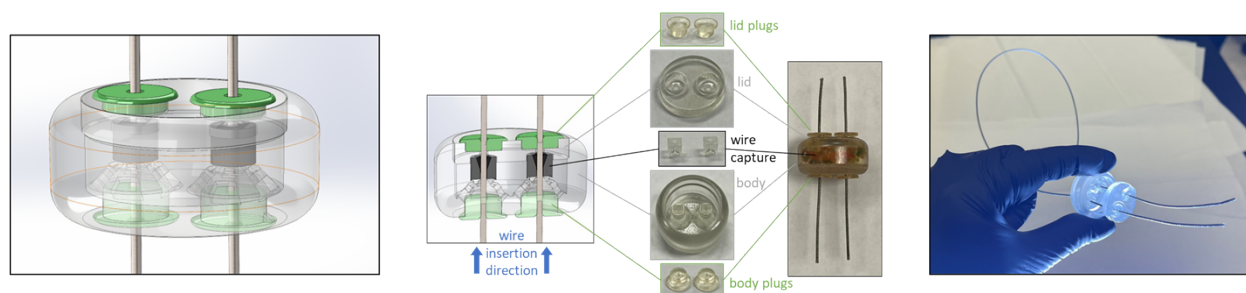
(Left) 3D transparent CAD image of Puck with all components shown; (Middle) CAD image showing cross section of Puck, individual 3D printed components, and fully assembled Puck with sensing mixture; (Right) unassembled Puck without sensing mixture showing wire loop inserted through Puck loop seal.
